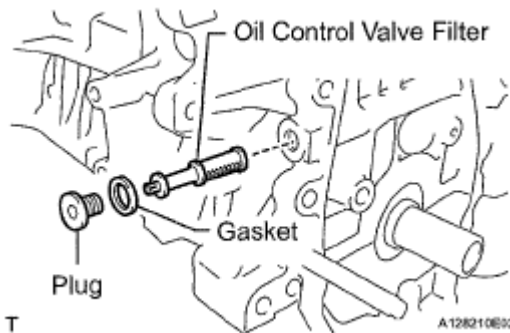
Identifying Gasket And Oil Control Valve Filter With Plug
